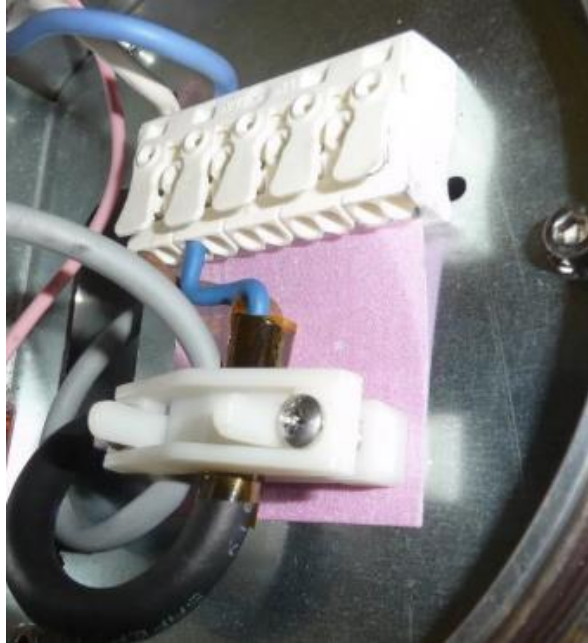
Overview of heat sink, LED driver fixture and internal wiring NEBULA ST
